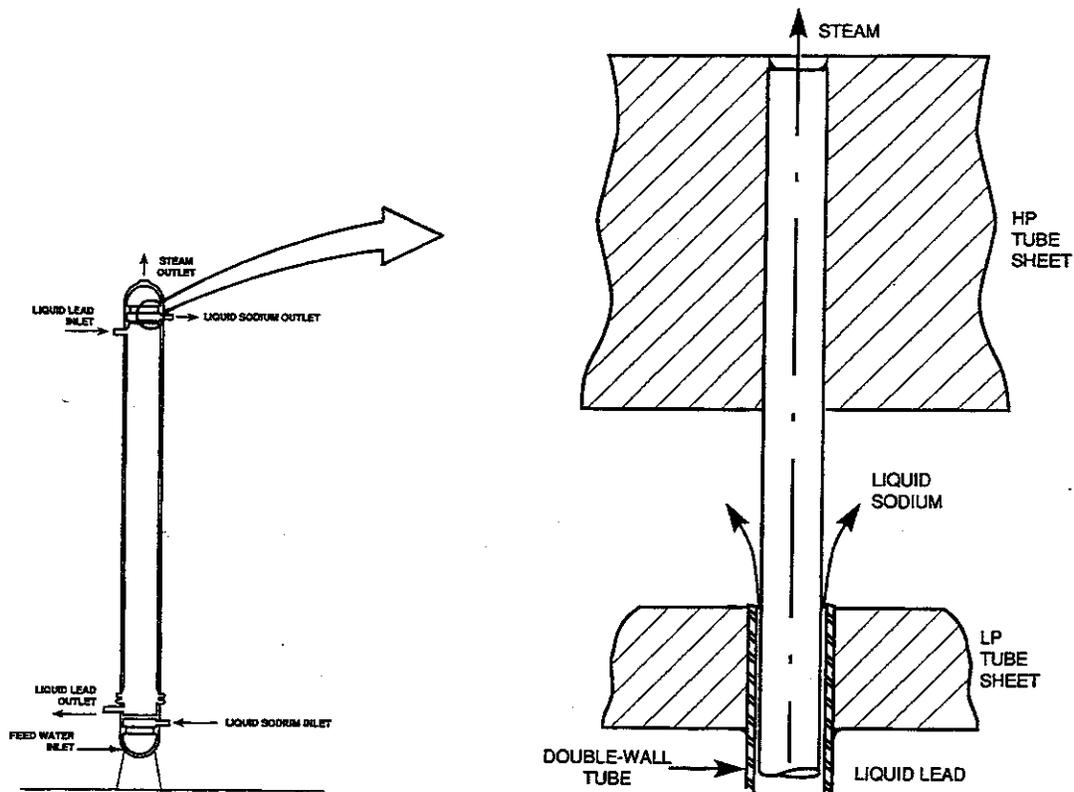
Liquid Lead Steam Generator - Top Tube Sheet Connections
